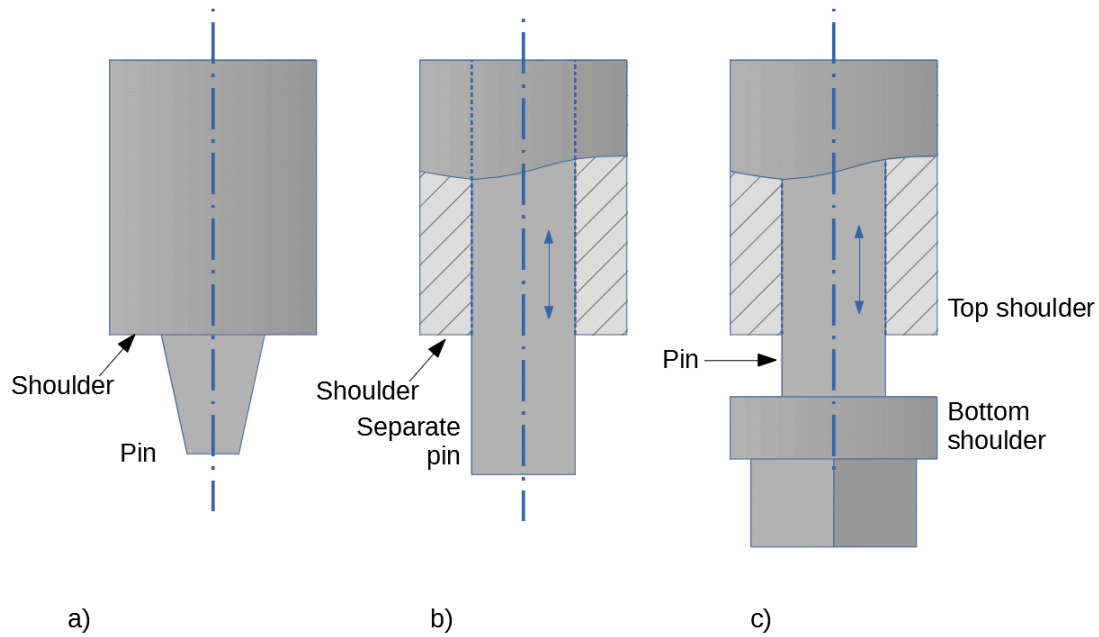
Schematic of FSW tool configurations: a) fixed b) adjustable c) bobbin
